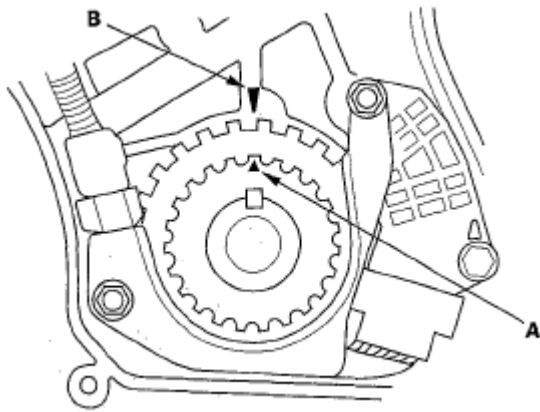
Identifying TDC Mark On Tooth Of Timing Belt Drive Pulley With Pointer On Oil Pump
